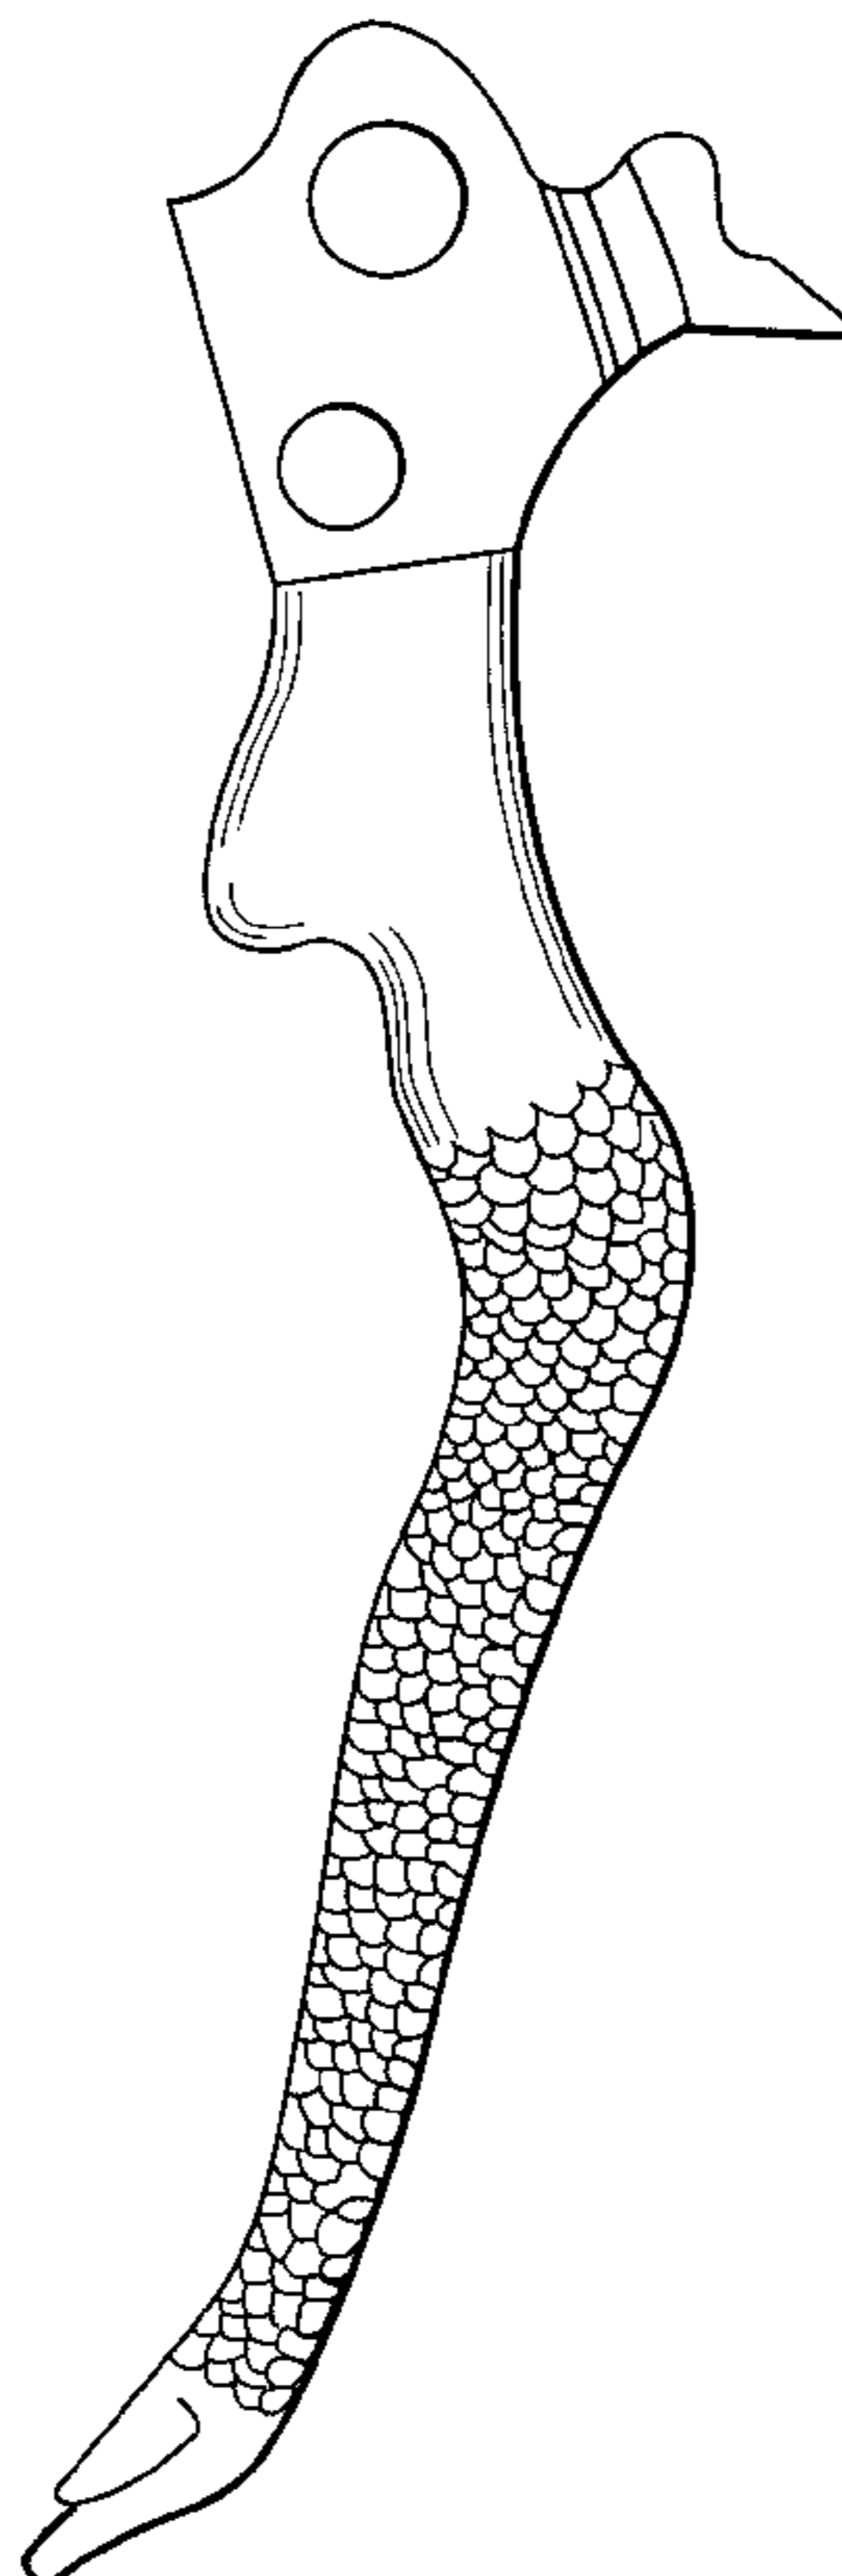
is a right side elevational view of a motorcycle brake or clutch lever of the present invention;
